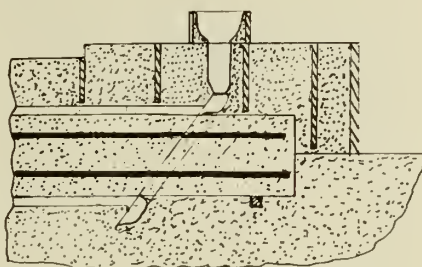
SHOWING ALTERNATIVE SYSTEM OF "DRAWING" FLANGES
